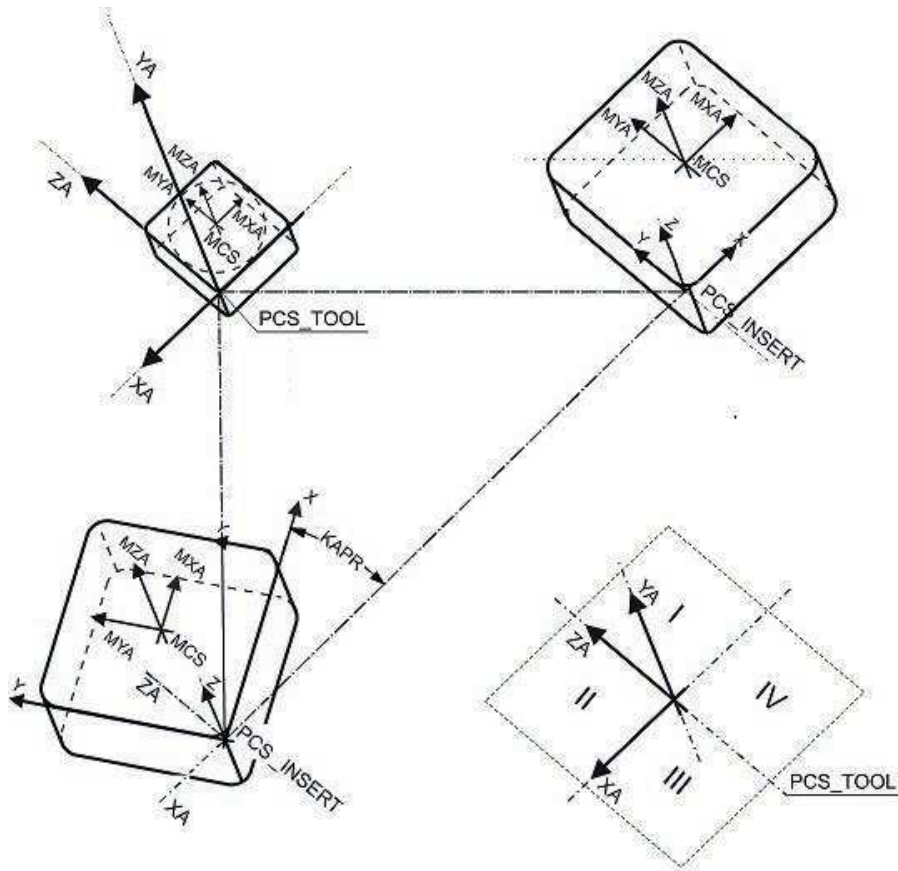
Orientation of PCS\_INSERT, MCS\_INSERT and PCS\_TOOL on end cutting edge angle
